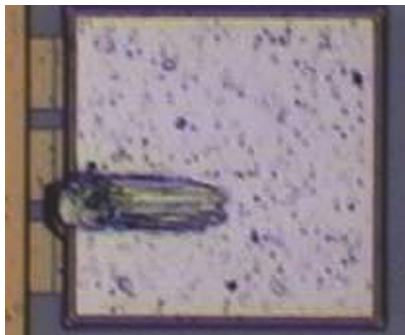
This image shows a probe mark that exceeded the limits of a bond pad and damaged surrounding passivation material. Courtesy of Camtek.
